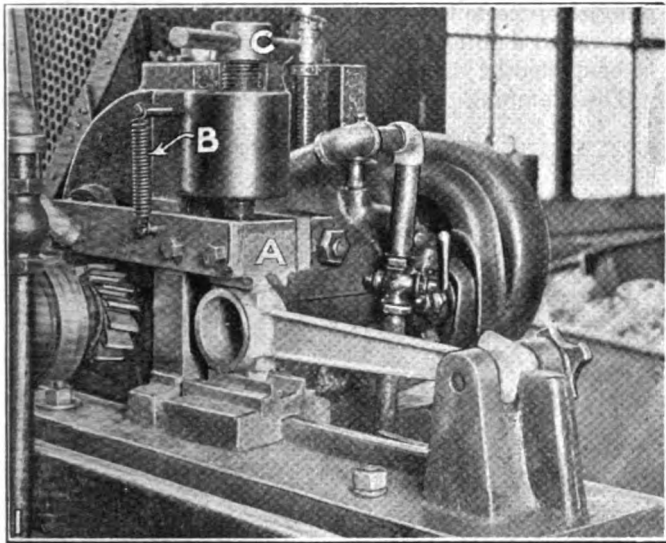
MILLING SIDES OF LARGE END. FIG. 2. MILLING THE SMALL END
